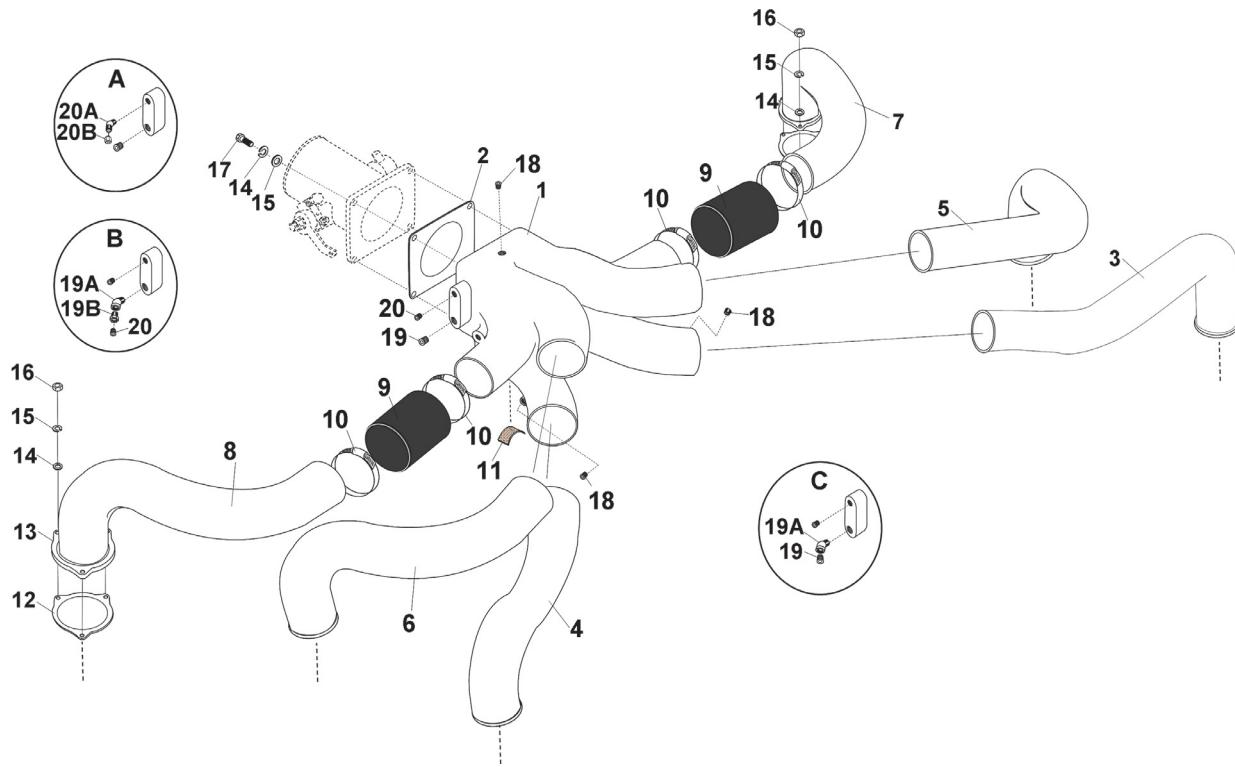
IO-550-G, N, P, & R Induction Assembly G N P R
